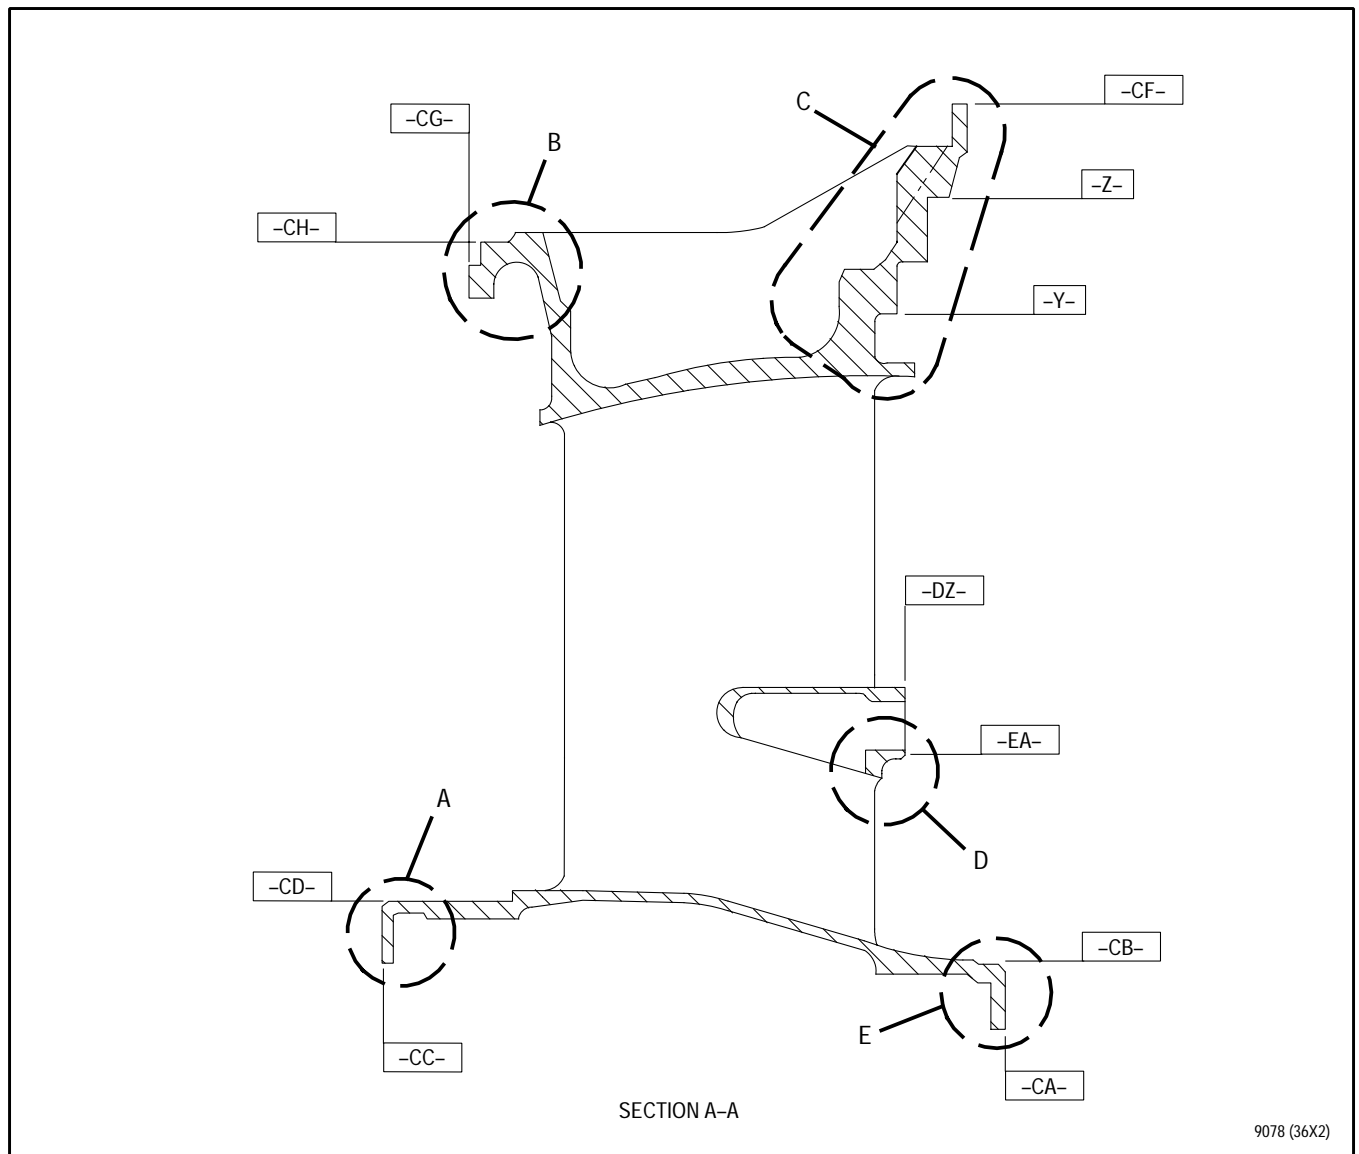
Compressor Intermediate Case Assembly - Plasma Spray Repair (Sheet 2 of 5)
